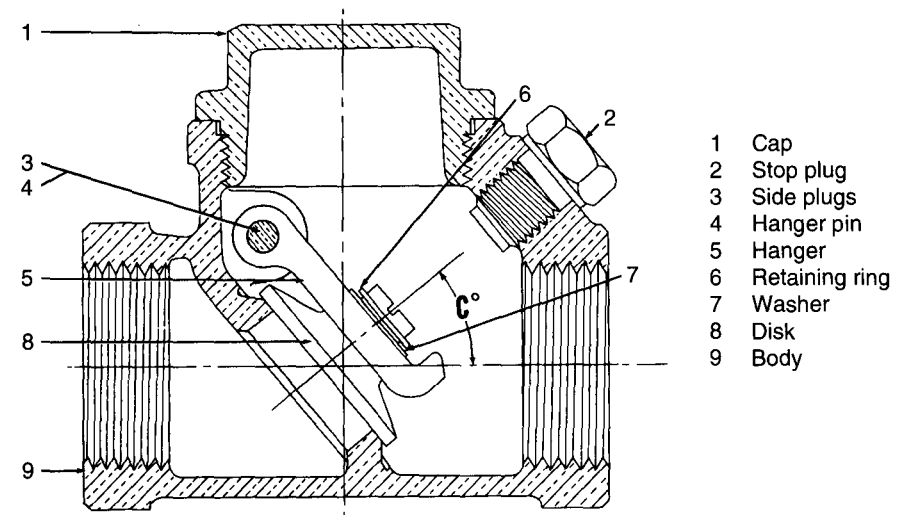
Swing-check valve. Courtesy Crane Company.
